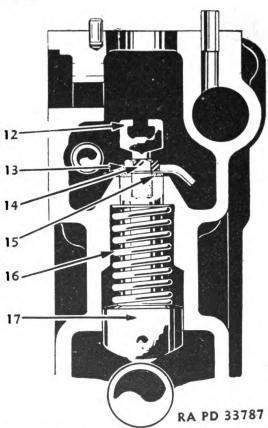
Fuel injection pump lifter spring assembly—schematic.
